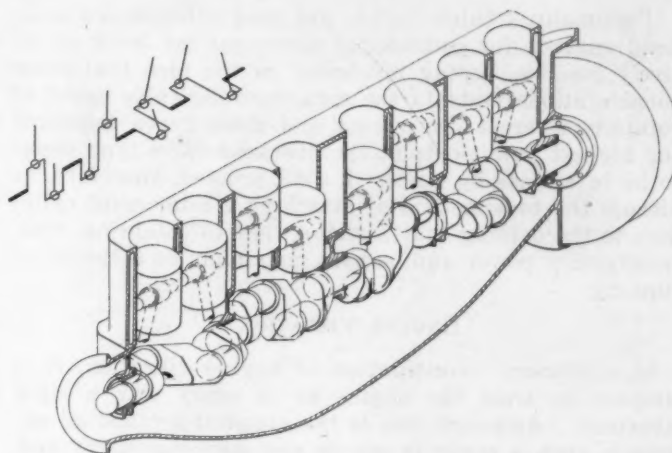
EIGHT-CYLINDER-IN-LINE FIVE-BEARING ENGINE
